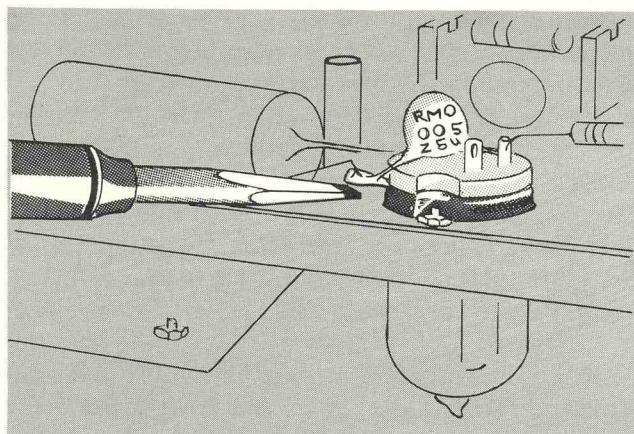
Soldering to a terminal. Note the slight fillet of solder--exaggerated for clarity--formed around the wire.
